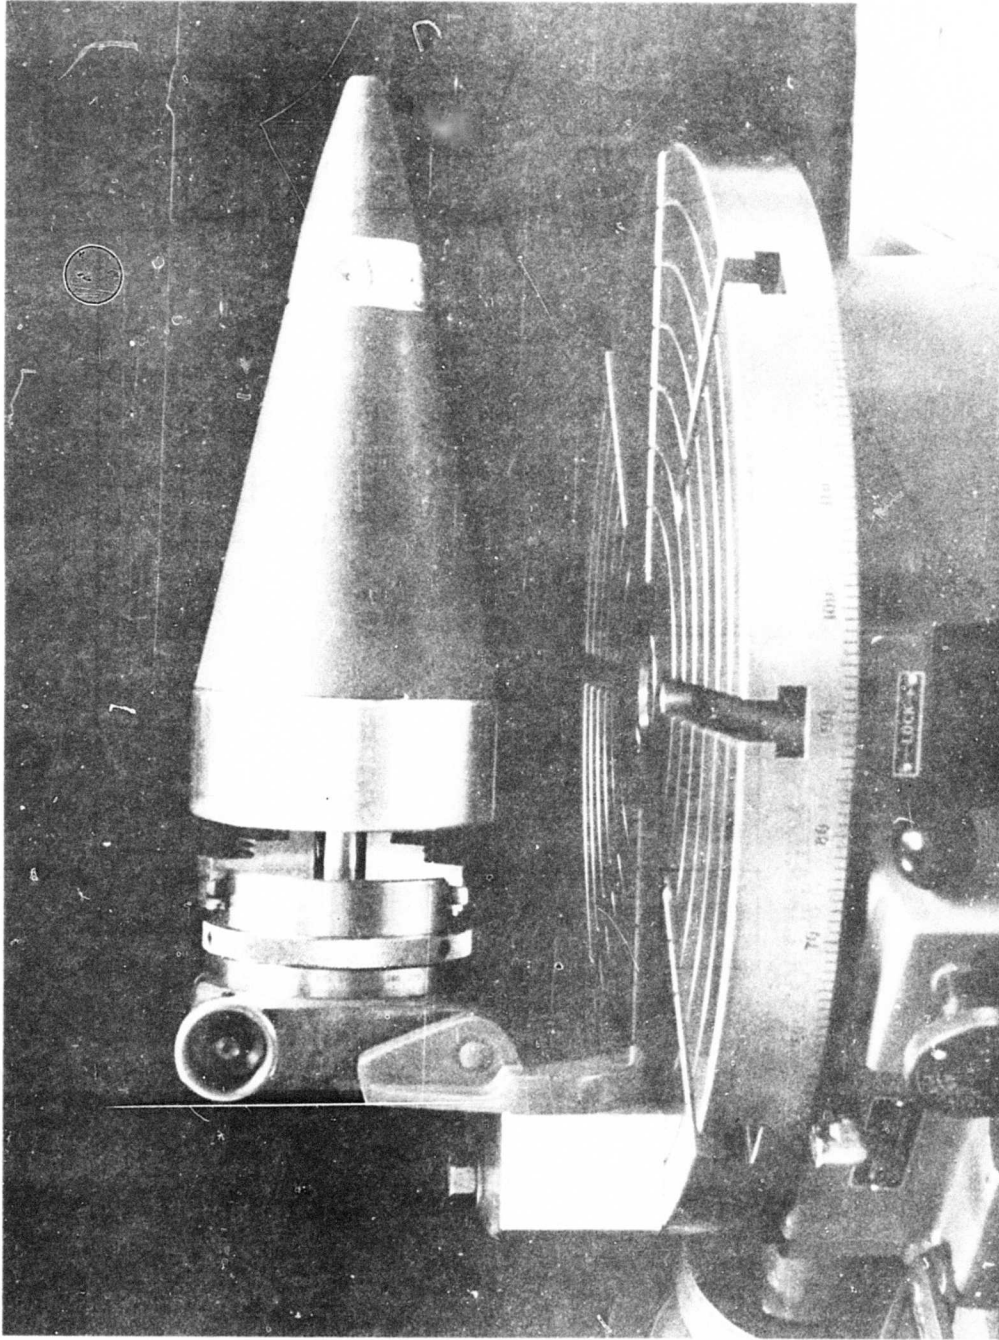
Current Calibration Fixture Showing Rotary Table and Indexed Dividing Head
